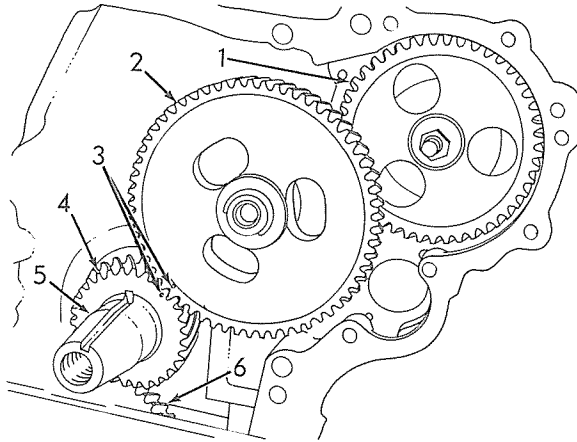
Typical Gear Train (All Engines with Roosa Master Fuel Injection Pump) (T-72703)
